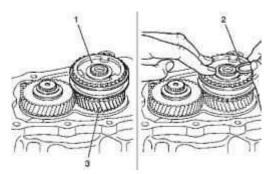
Installing the gear, gear and fifth gear fifth gear synchronizer body with the main shaft: 1 - body synchronizer, 2 - retainer ring, 3 - fifth gear transmission
